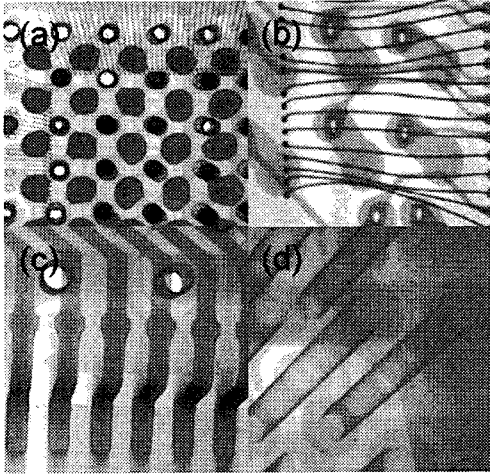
Examples of NDT&E images.<sup>11</sup> (a) BGA, (b) wire sweeping, (c) gull-wing pads, and (d) via holes of a multilayer PCB
